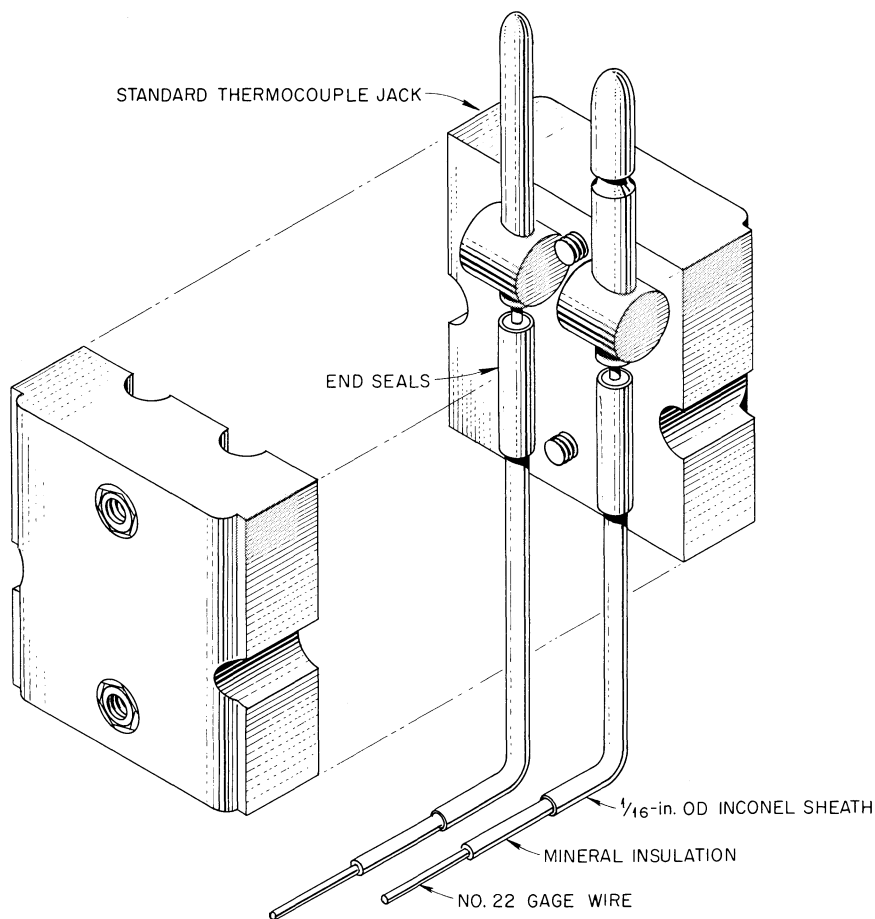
End Seal for 1/16-in.-OD Mineral-Insulated Thermocouple and Typical Thermocouple Disconnect.
